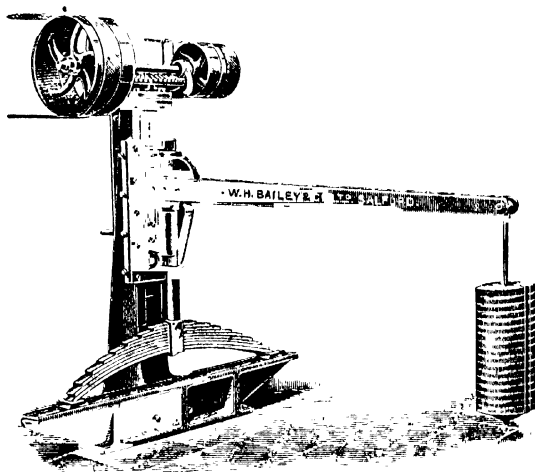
THE BAILEY SPRING TESTING MACHINE.
